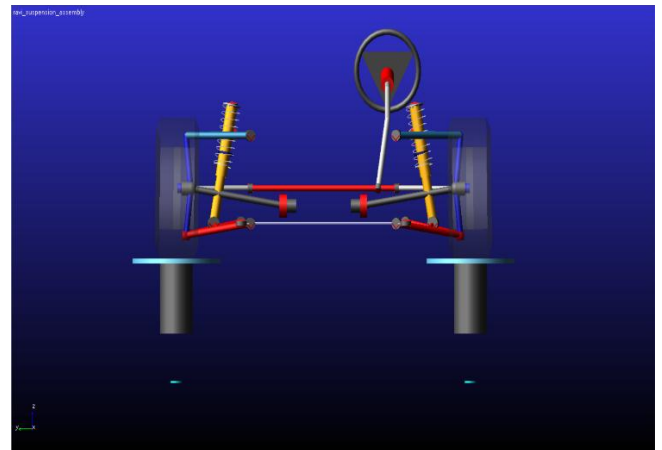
Modified suspension assembly simulation setup on MSC/ADAMS car test rig
